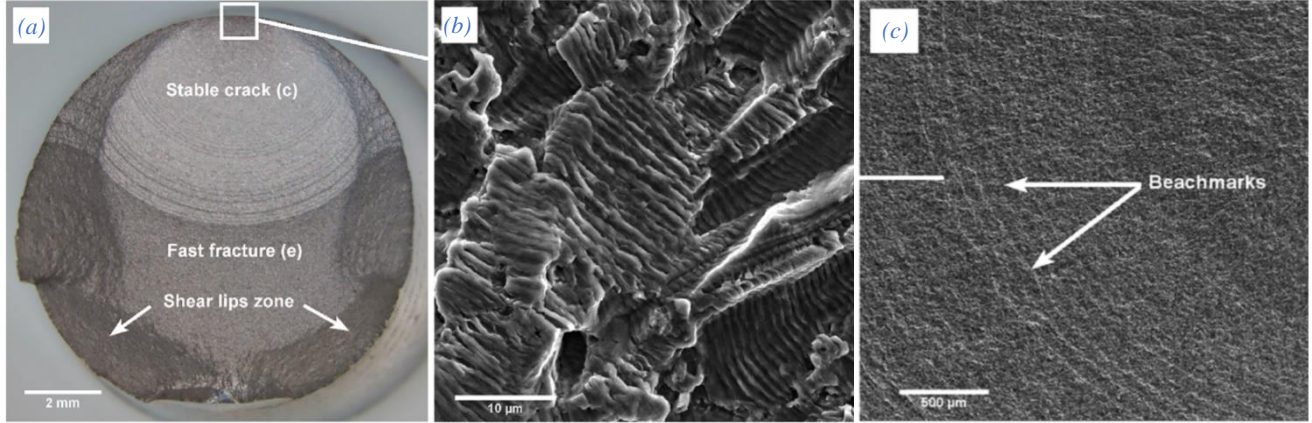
Fracture surface of HCF IN625 specimens fabricated by hot rolling and annealed at 910°C for 2 hours. Beachmarks or striations show a stable crack formation.
